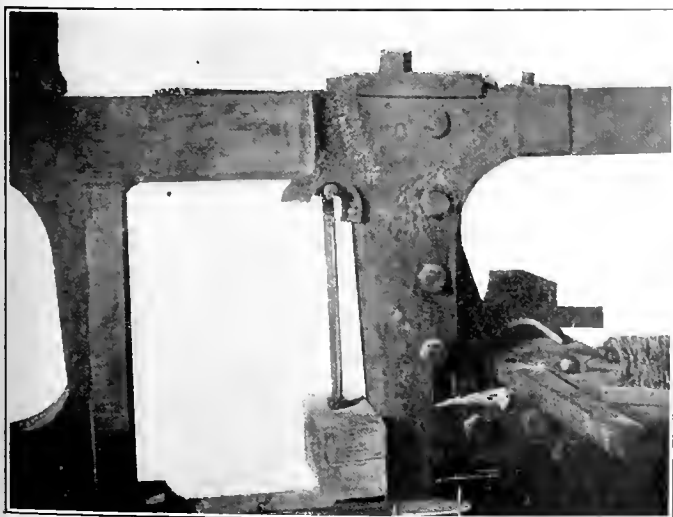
ENGINE FRAME IN COURSE OF REPAIR BY WELDING
